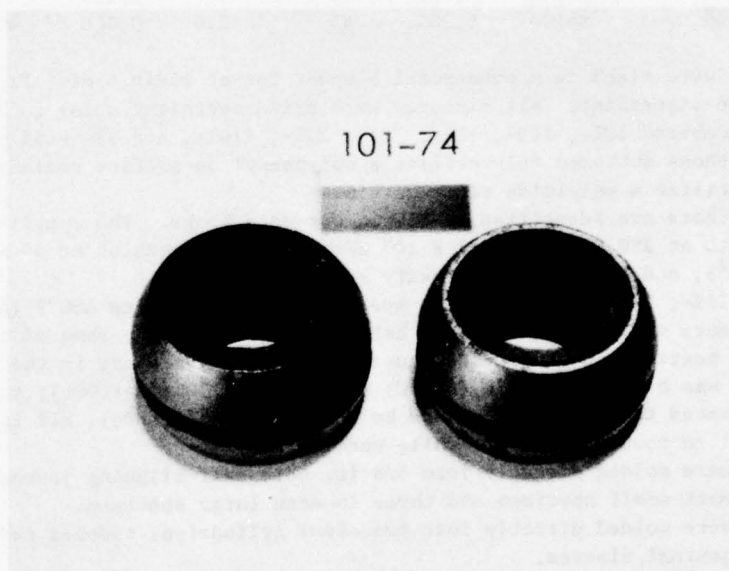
Photograph of Journal Specimens, CID-101-74, Machined After
